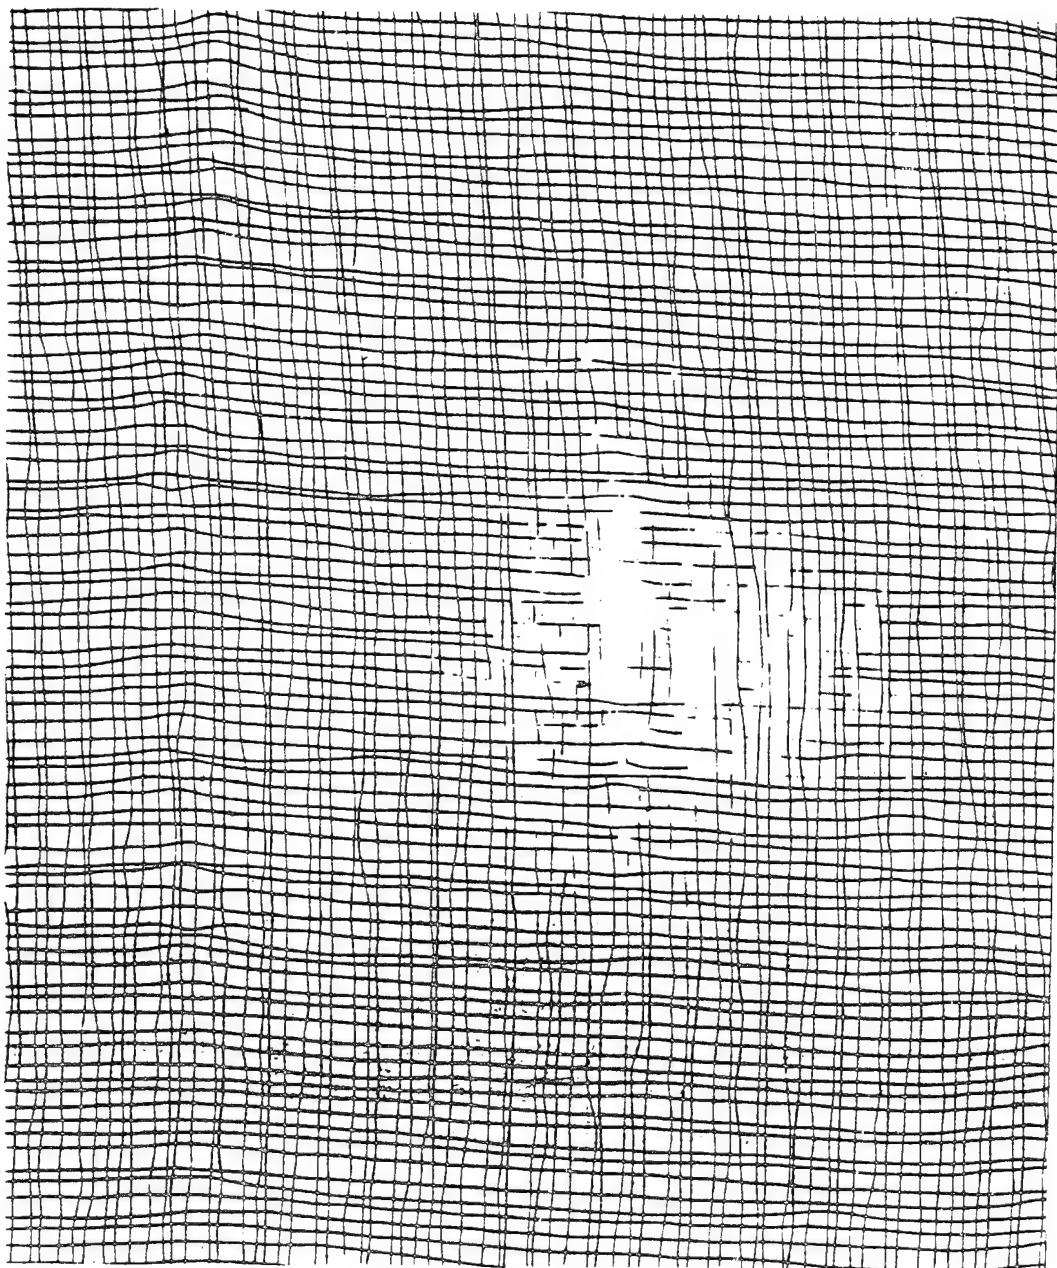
X-Ray of -507 CAI Specimen Showing Damage to Aluminum Wires
